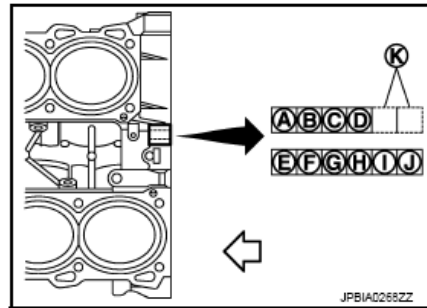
Identifying Bearing Housing Grades And Cylinder Bore Grades
